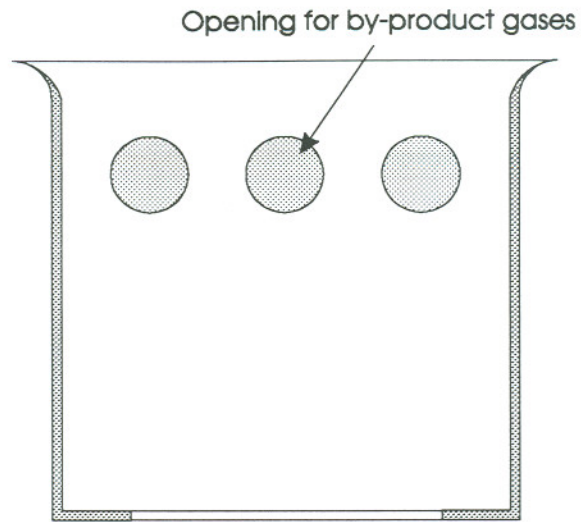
Cross-sectional view of PBN pedestal, shown to scale.
